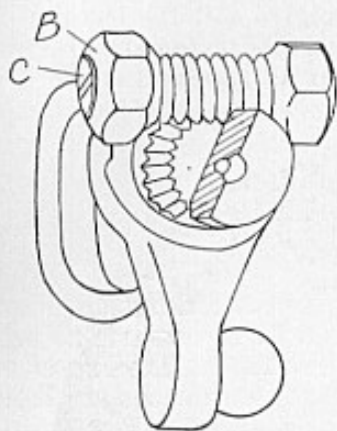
Section through wormscrew cam lever adjustment used on early lever type control
